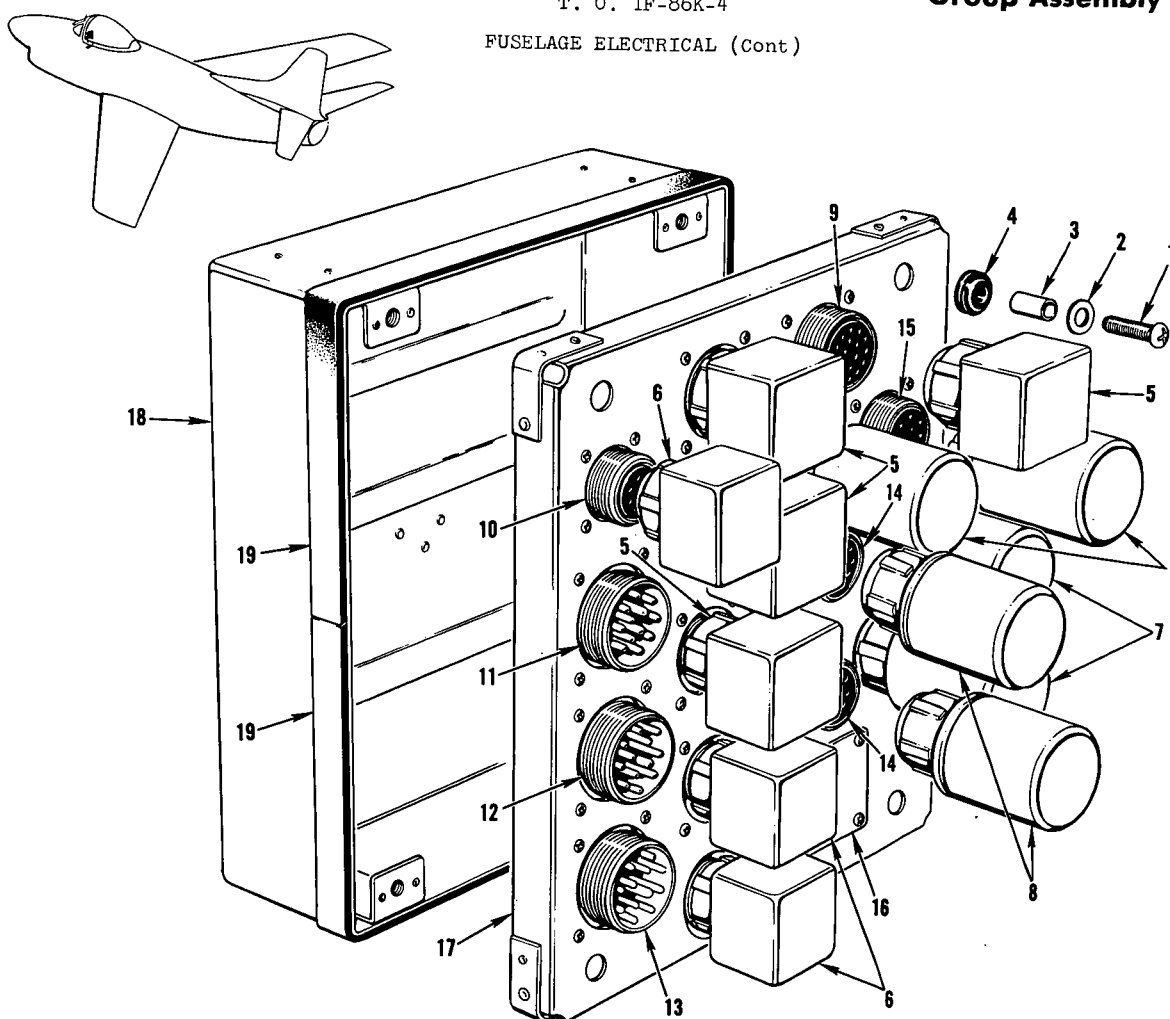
ELECTRICAL COCKPIT RELAY PANEL ASSEMBLY
